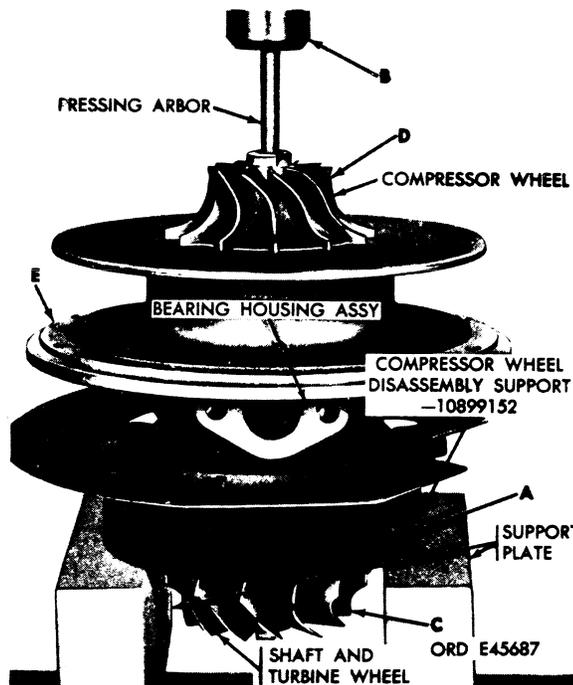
PRESSING SHAFT AND TURBINE WHEEL OUT OF COMPRESSOR WHEEL AND BEARING HOUSING.
